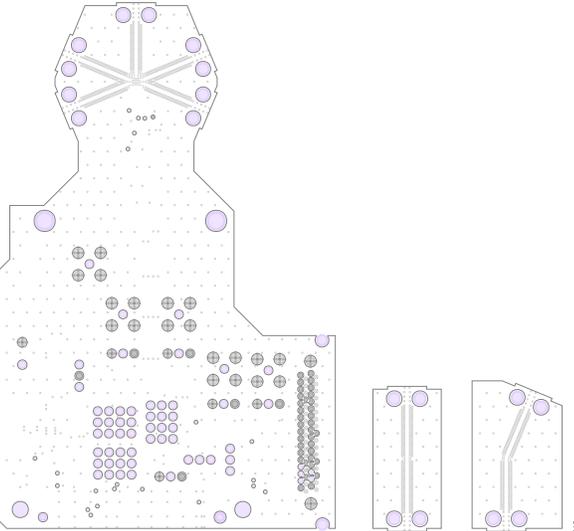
EVAL-ADGM3144SDZ Component Side Ground Plane PCB Drawing (Layer 2)
